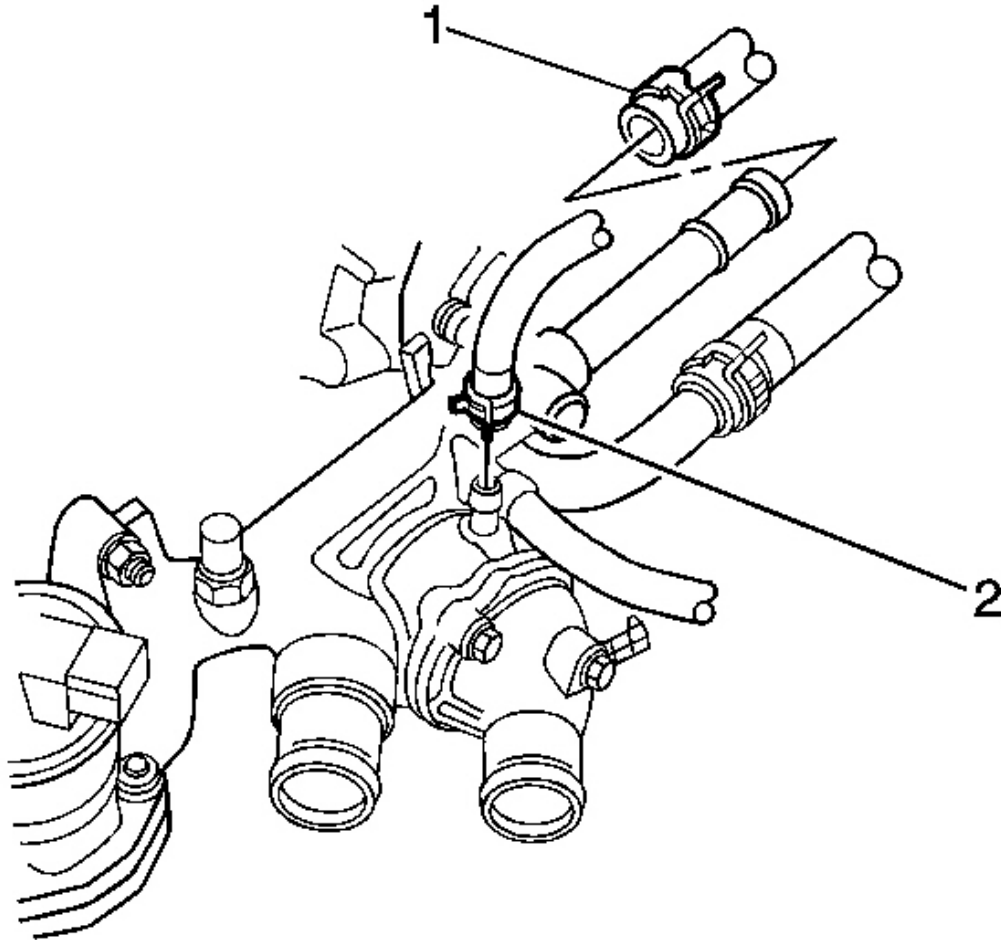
Identifying Inlet & Outlet Heater Hoses
